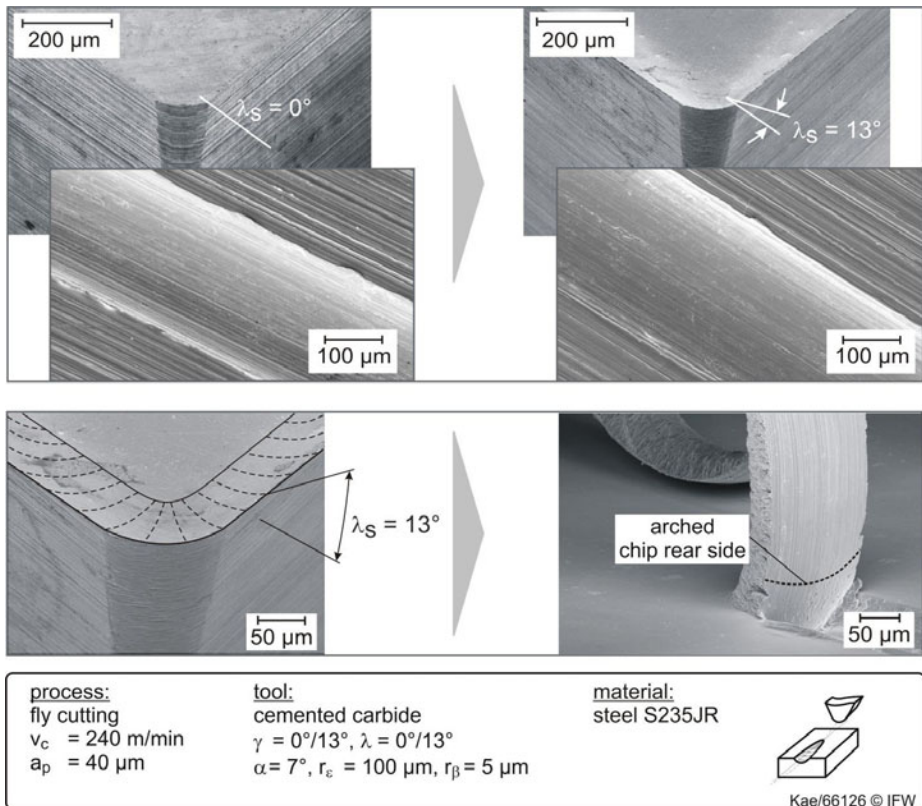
Reduction in burr dimensions by use of positive tool cutting edge inclinations
